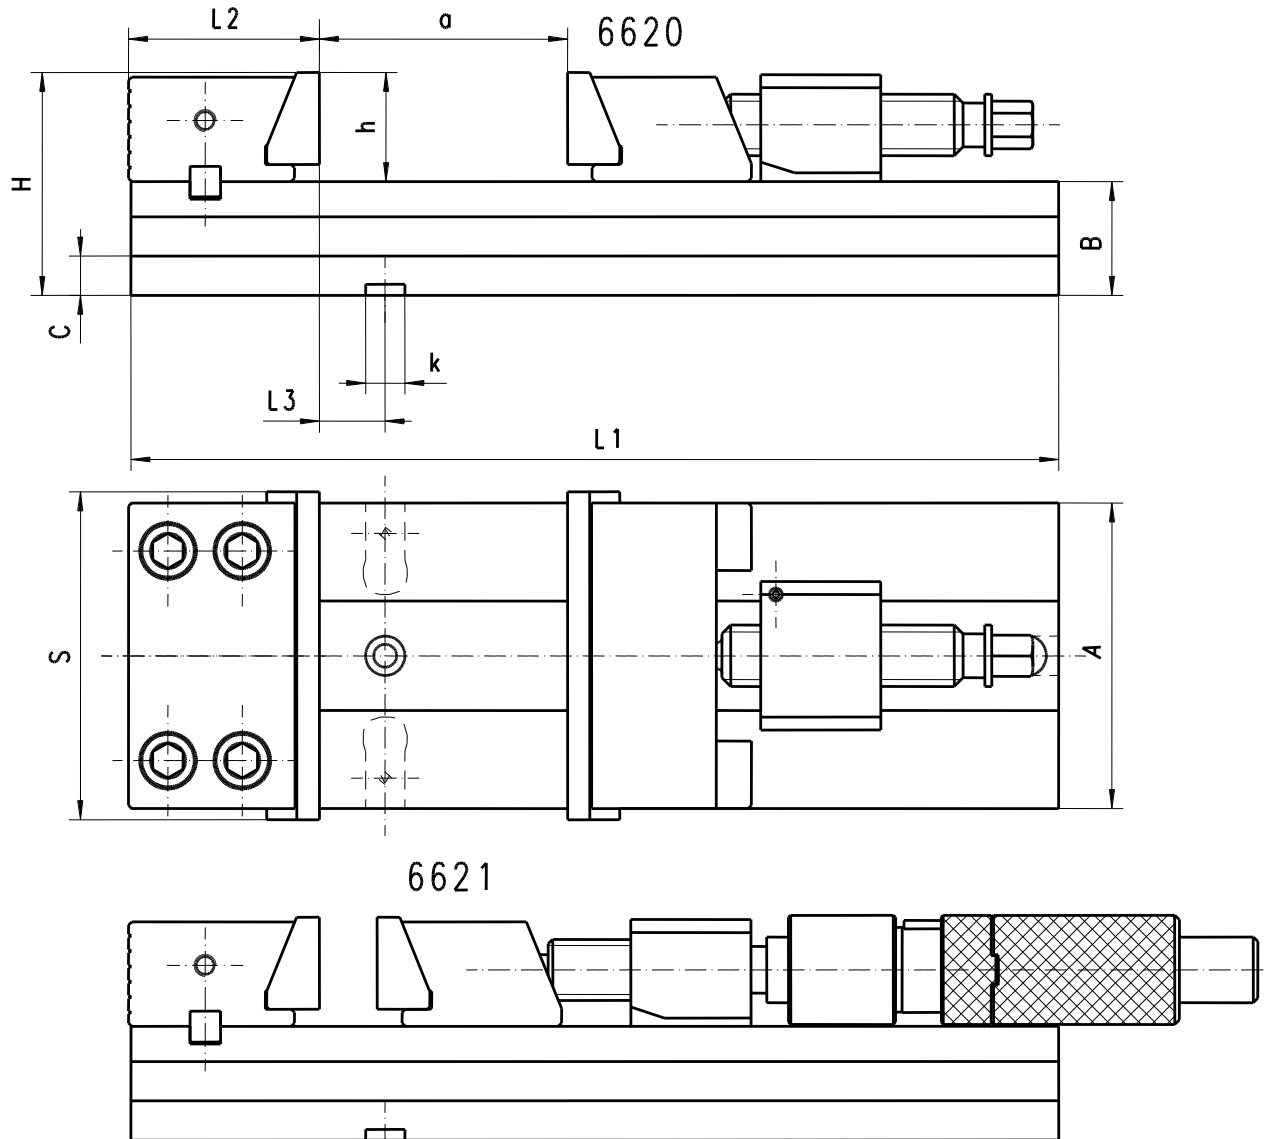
Basic dimensions of precision machine vises- type 6620 and 6621.
